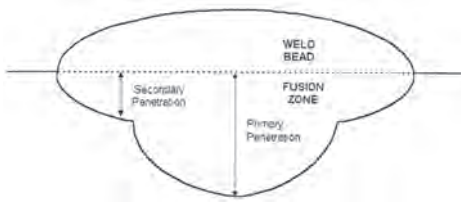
Schematic diagram of weld bead and fusion profile.
